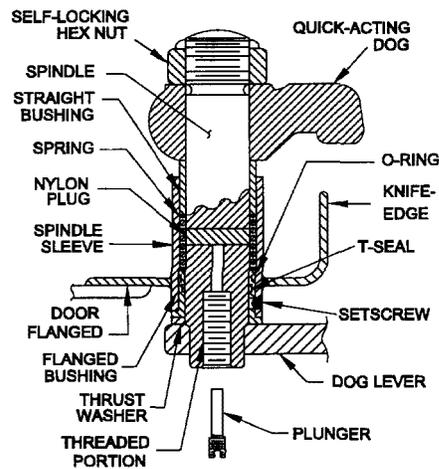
A. Quick-Acting Door Dog Assembly (Cross Section View) Modified by MACHALT 167-31004 (ECP-444)
